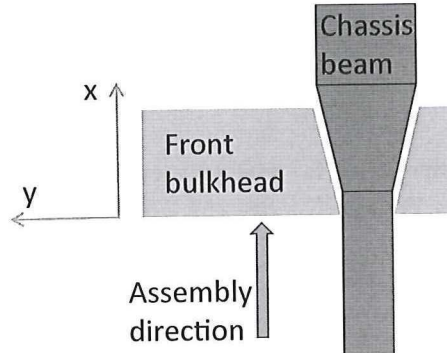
Schematic representation showing a top view of the front bulkhead and chassis beam with a tapered design. Note the taper is exaggerated for illustration purposes. The arrow shows the assembly direction of the front bulkhead w.r.t. the chassis beam
